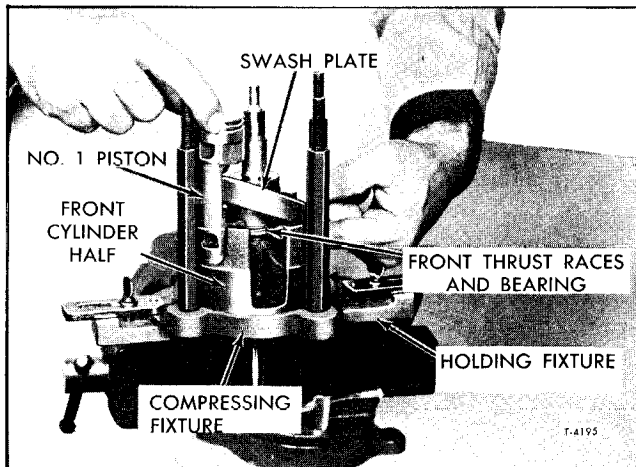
Installing Piston Front Ball and Seat and Rear Ball
